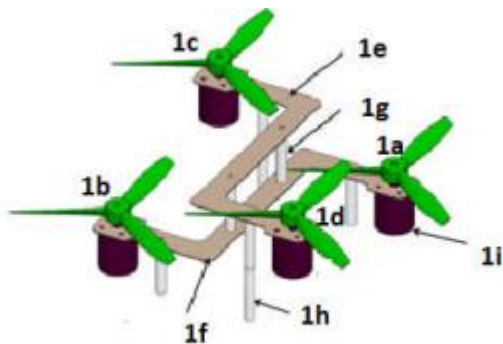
Illustrates isometric view of VOOPS Quadrotor showing propeller, upper & lower Z frame, standoff, landing gear, motors;
